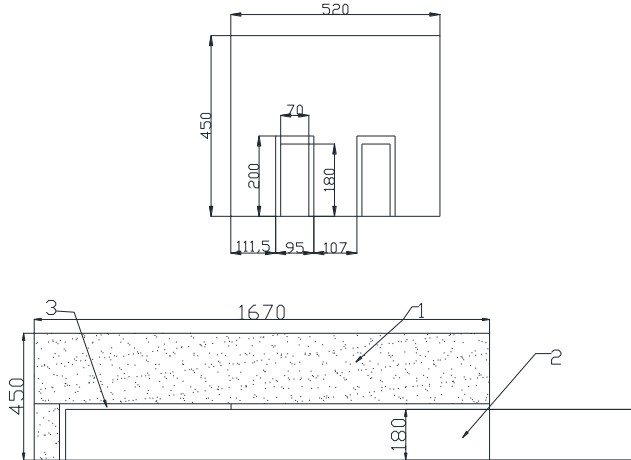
Cathode dimensions in mm. Top: End view. Bottom: Side view.
